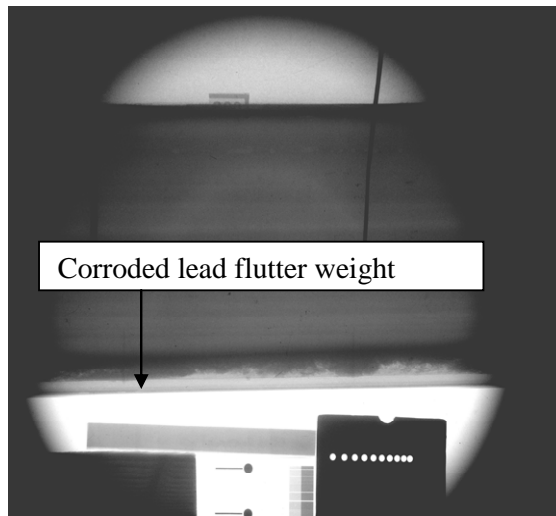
Front Edge of the Ka-26 Helicopter Rotor Blade Revealed by NR with Corrosion Products on the Anti-Flutter Weight.
